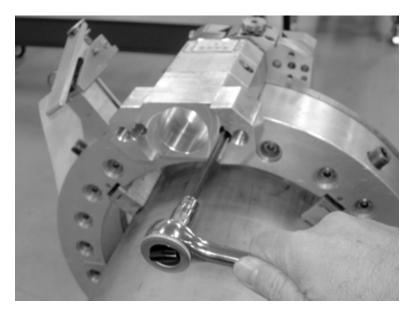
Tighten the 2 screws holding the hydraulic drive adapter to the pinion housing.
